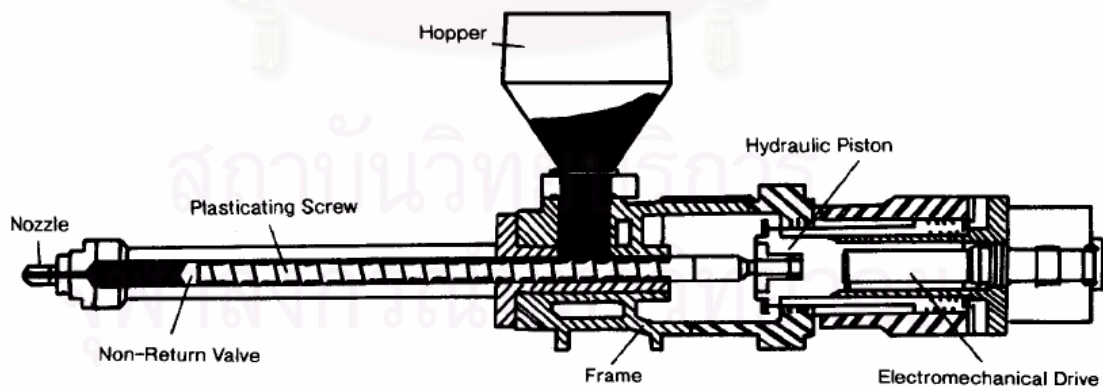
Schematic of plasticating and injection portion of conventional reciprocating screw injection molding machine(8)
